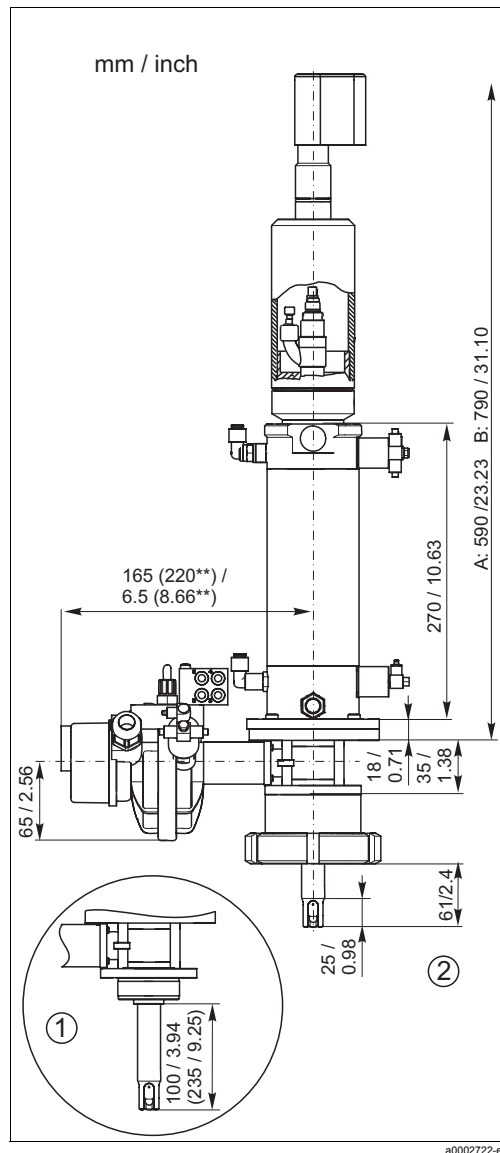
Assembly version: pneumatic, short, for KCl sensors
